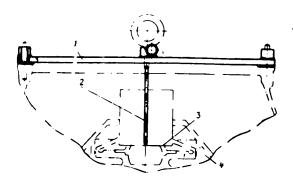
A Jack for Measuring Compressor Rotor Axial Clearances in the Casing
